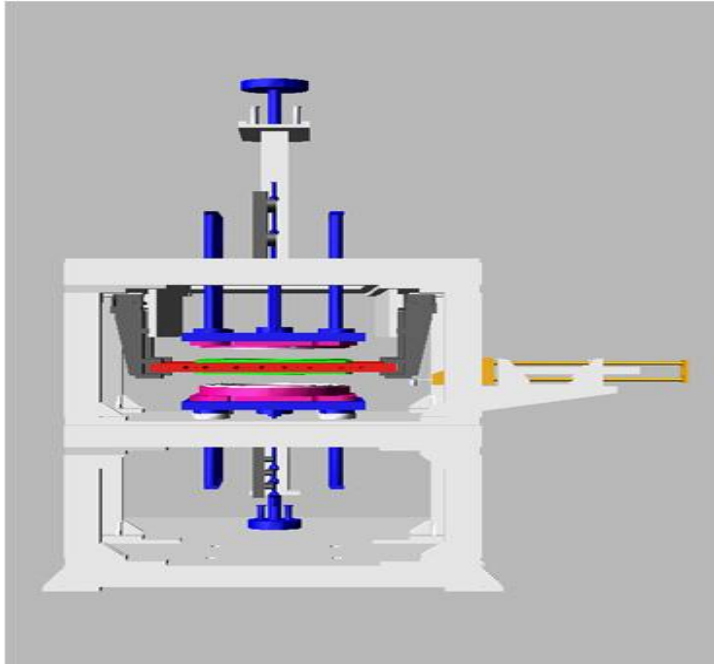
Modeling of hot plate welder in ADAMS
